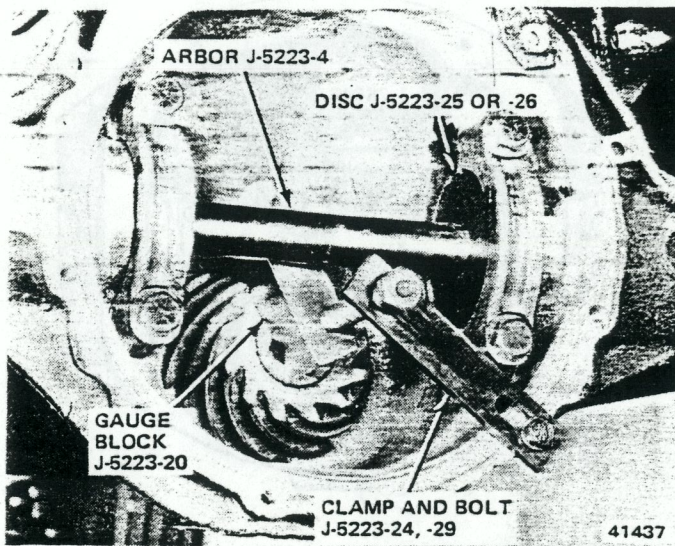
F-54 Installing Pinion Depth Gauge Tools
